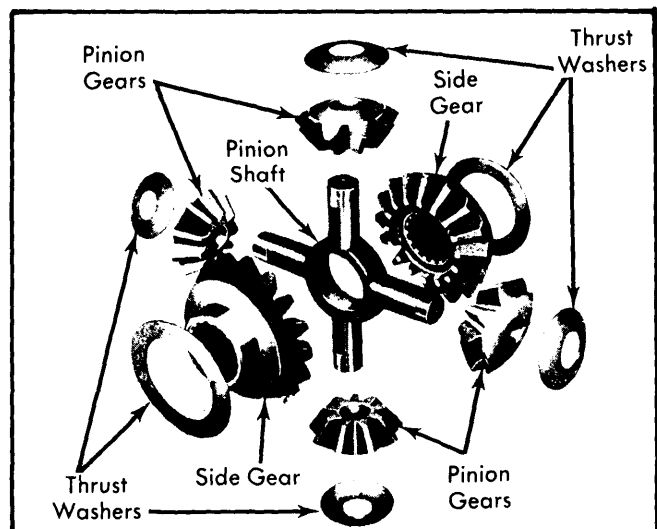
Differential Pinion Shaft Pinion Gears, Side Gears, Thrust Washers
